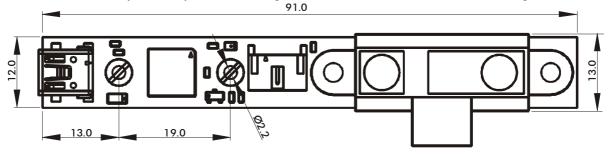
Mechanical dimensions of the Oak Dist sensor (not including cable)
